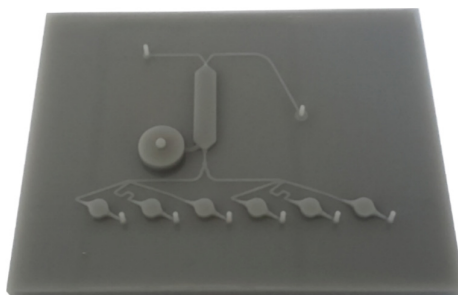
3D printed positive mould used for creating negative PDMS mould. Created by viper si2 SLA printer.
